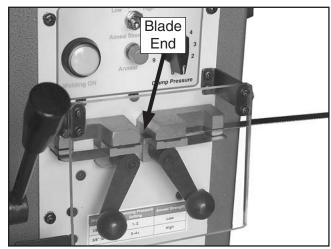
Blade end properly position in welding clamp and locked in place.
